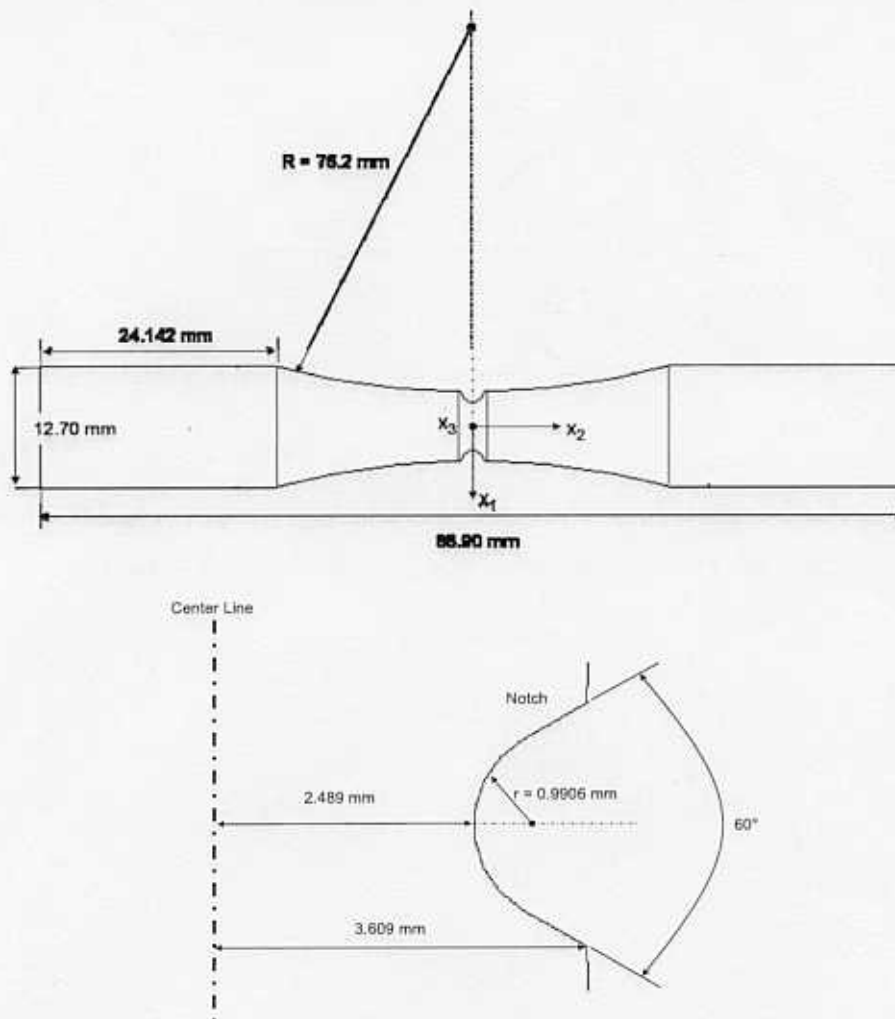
Specified geometry of notched specimens for 'macro' model FE simulations, showing details of notch root geometry in expanded view at bottom.
